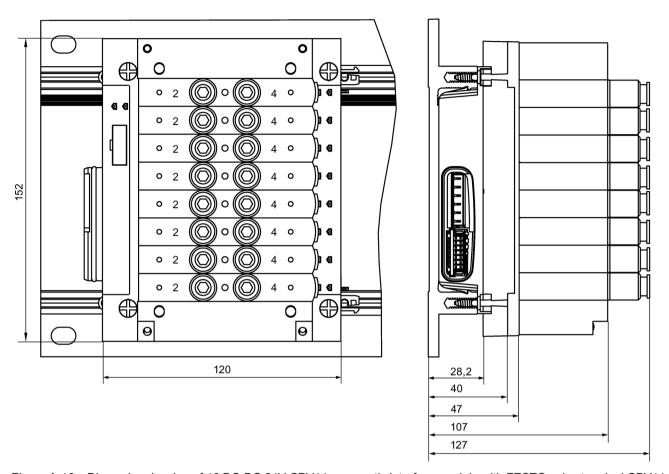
Dimension drawing of 16 DO DC 24V CPV14 pneumatic interface module with FESTO valve terminal CPV14 on compact type rack
